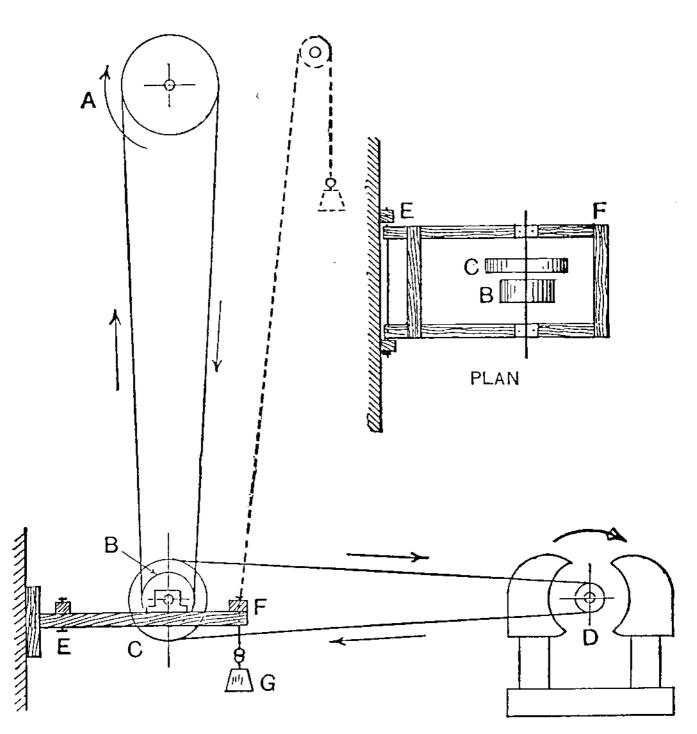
Driving Belt Arrangement for Wind Electrical Plant.
